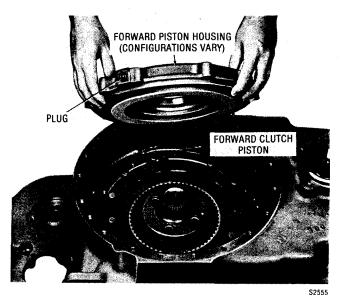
Removing forward clutch piston housing and piston (TT, TTB 2221-1, 2421-1)
